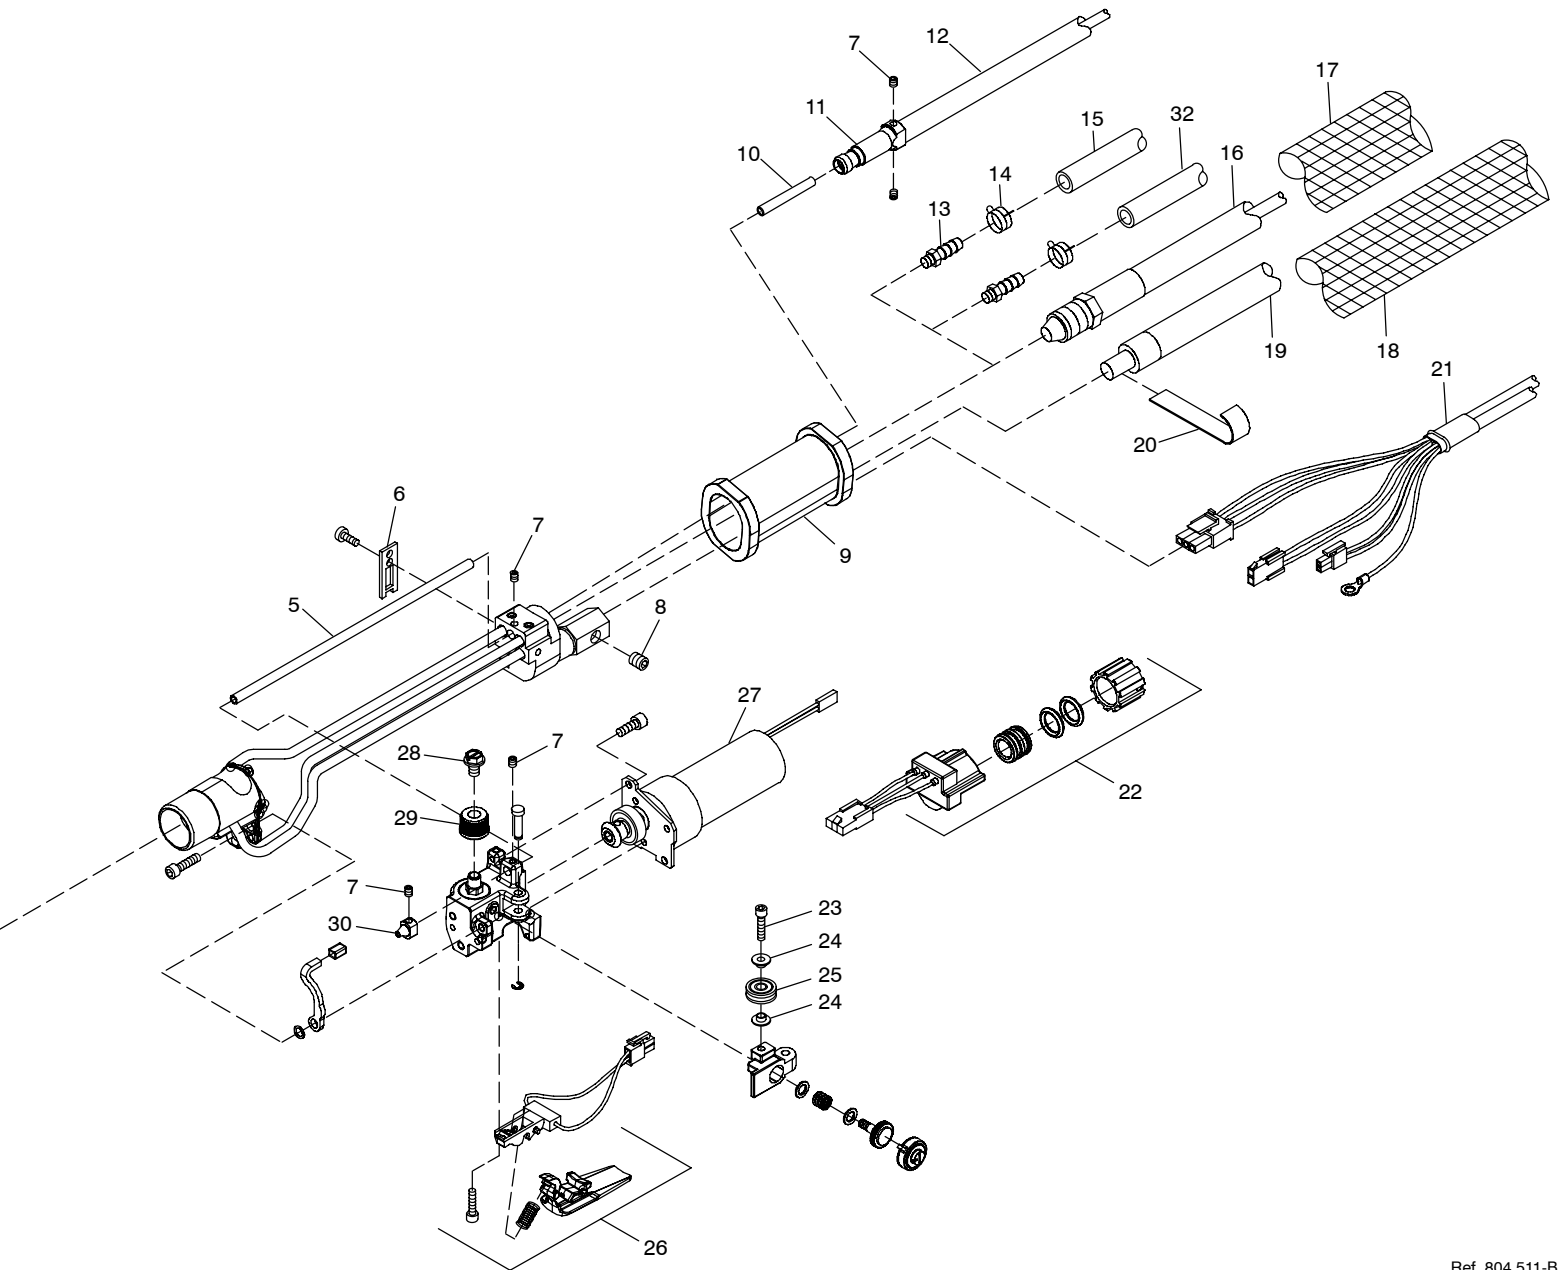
Exploded View Of XR-A Aluma-Pro Gun
